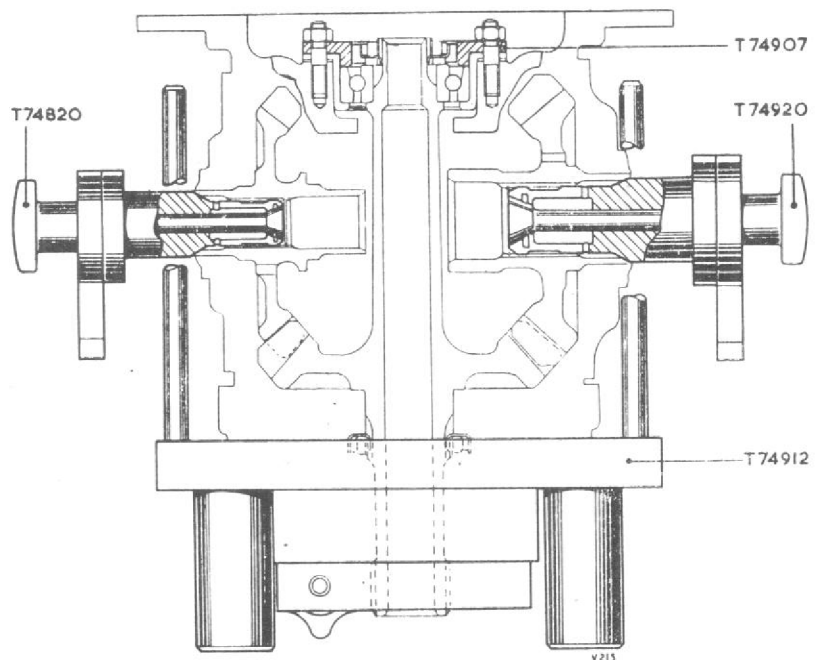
Checking the backlash between the vertical drive bevel gear and the bevel gear on the horizontal shaft
